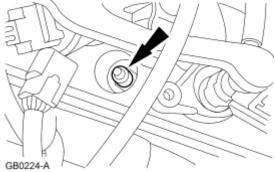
Ignition Coils & Bolts Courtesy of FORD MOTOR CO.
